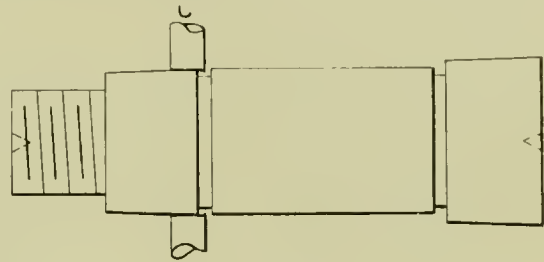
Position of Micrometer Calipers in Measuring Largest Taper Diameter
